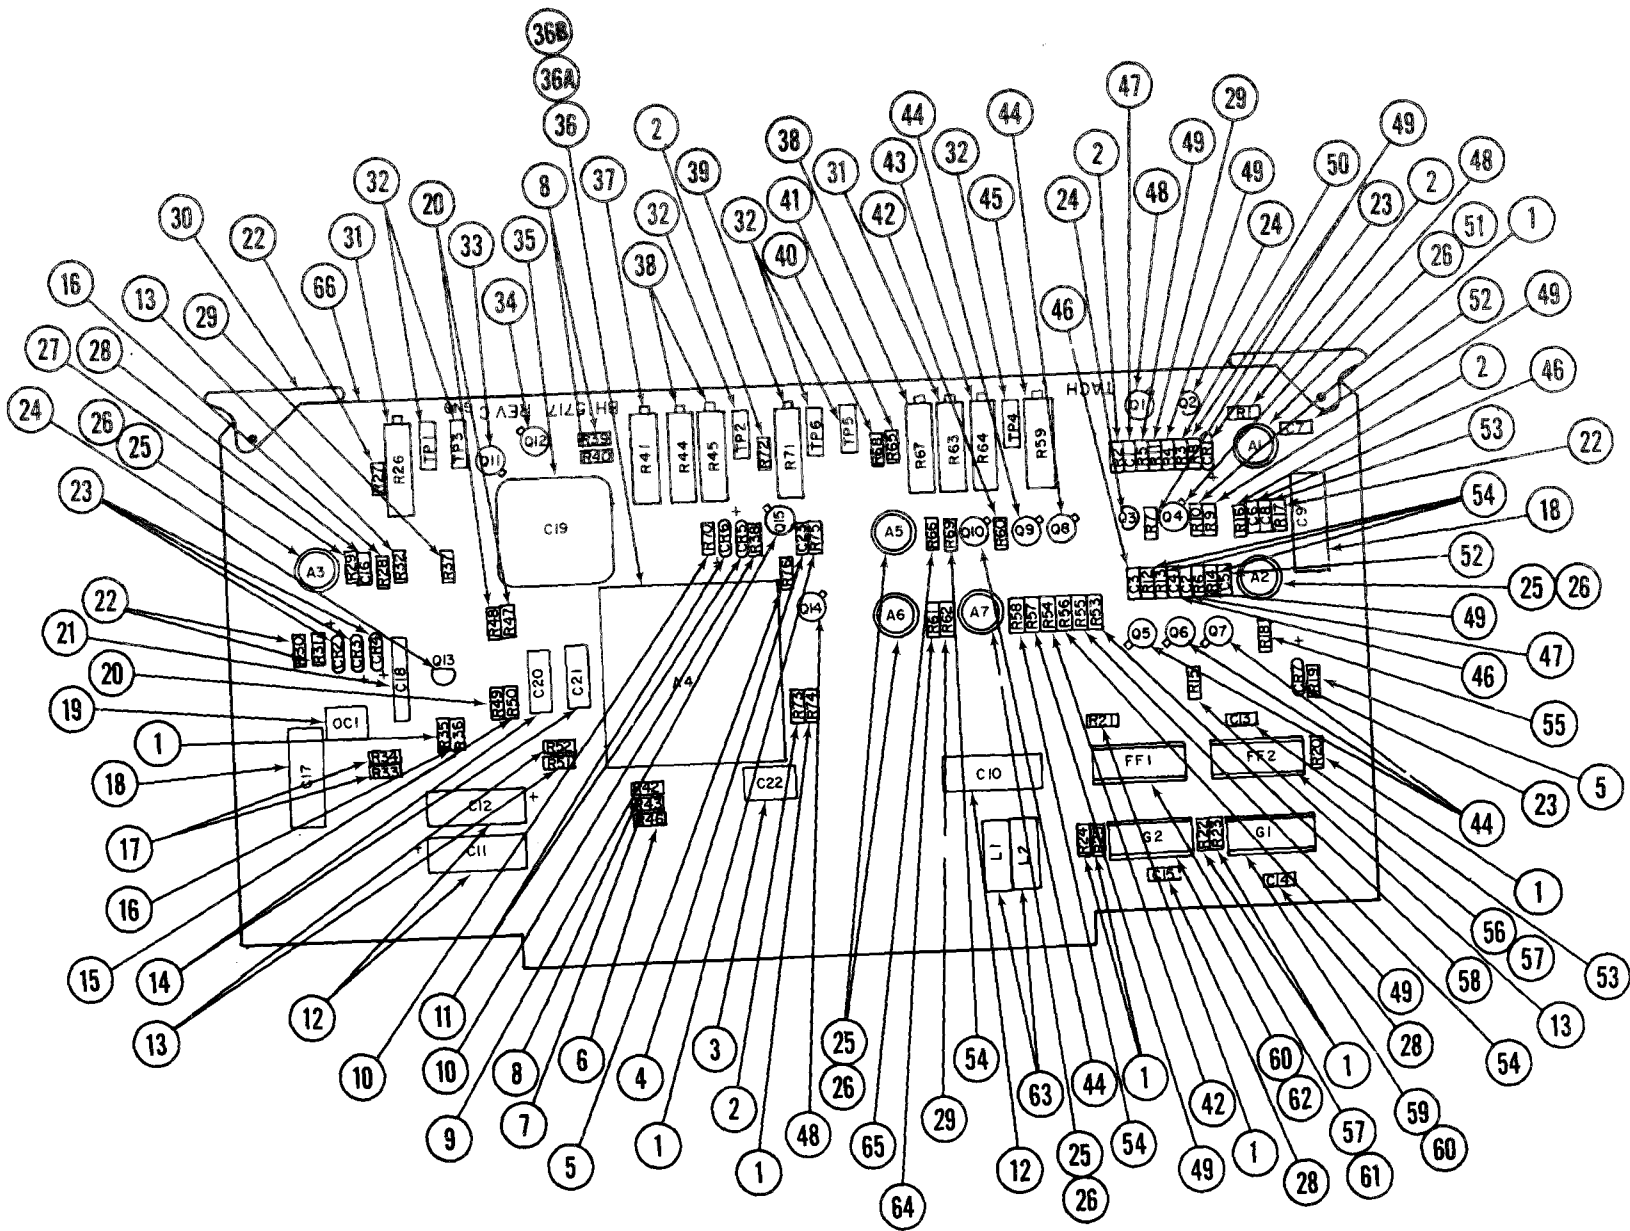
BH15717-1 Tachometer Circuit Board Assembly.
